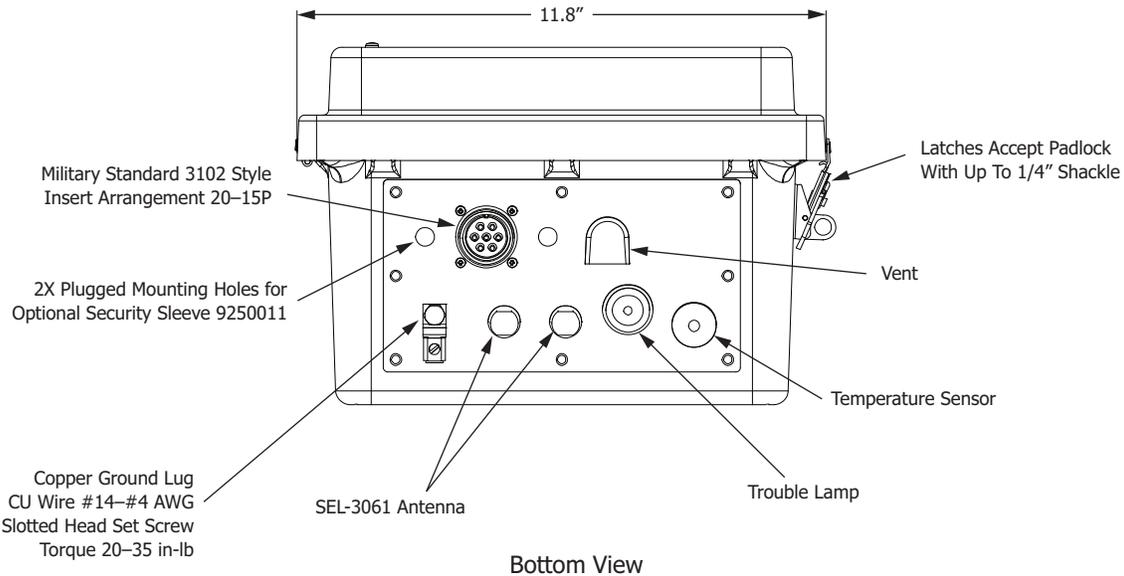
Bottom View of Connectorized Compact Enclosure
